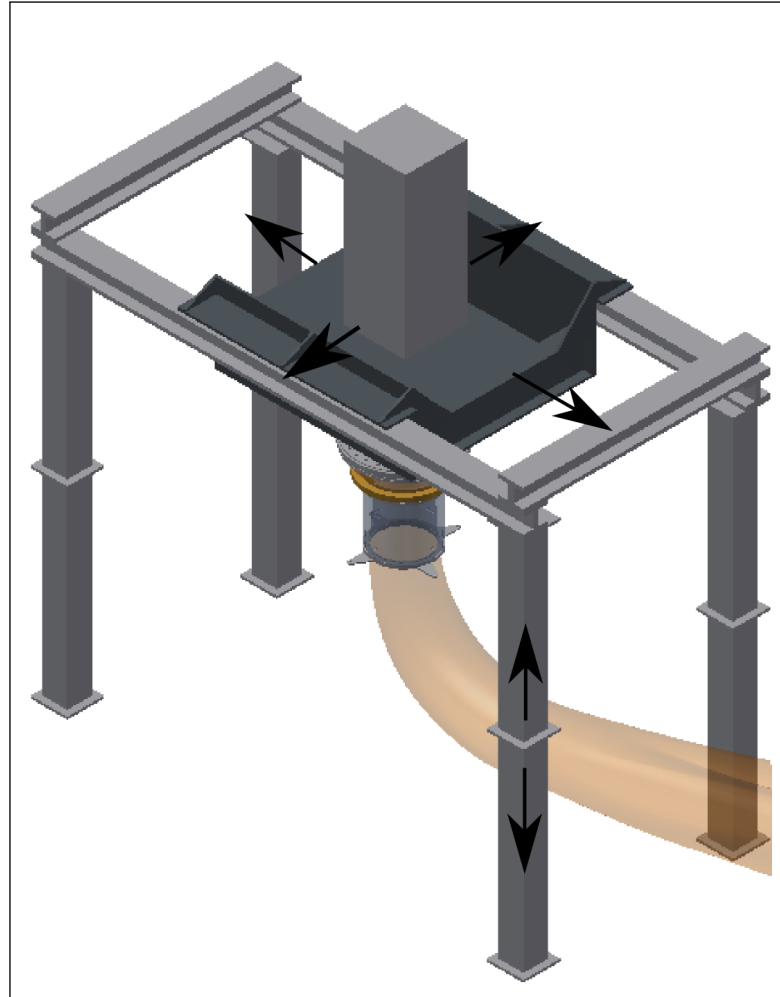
3D CAD drawing of the suggested design of the structure supporting the generator and the turbine.
